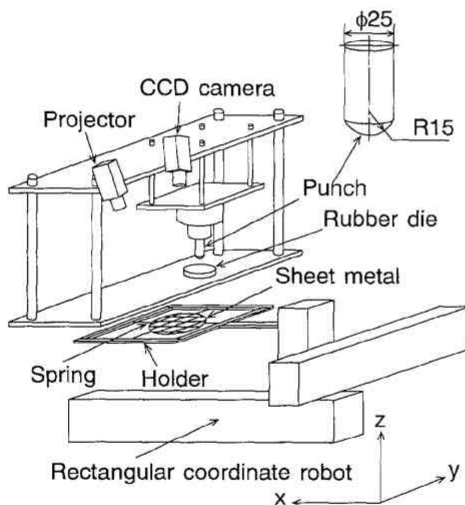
Incremental forming machine with hemispherical steel punch and rubber die
